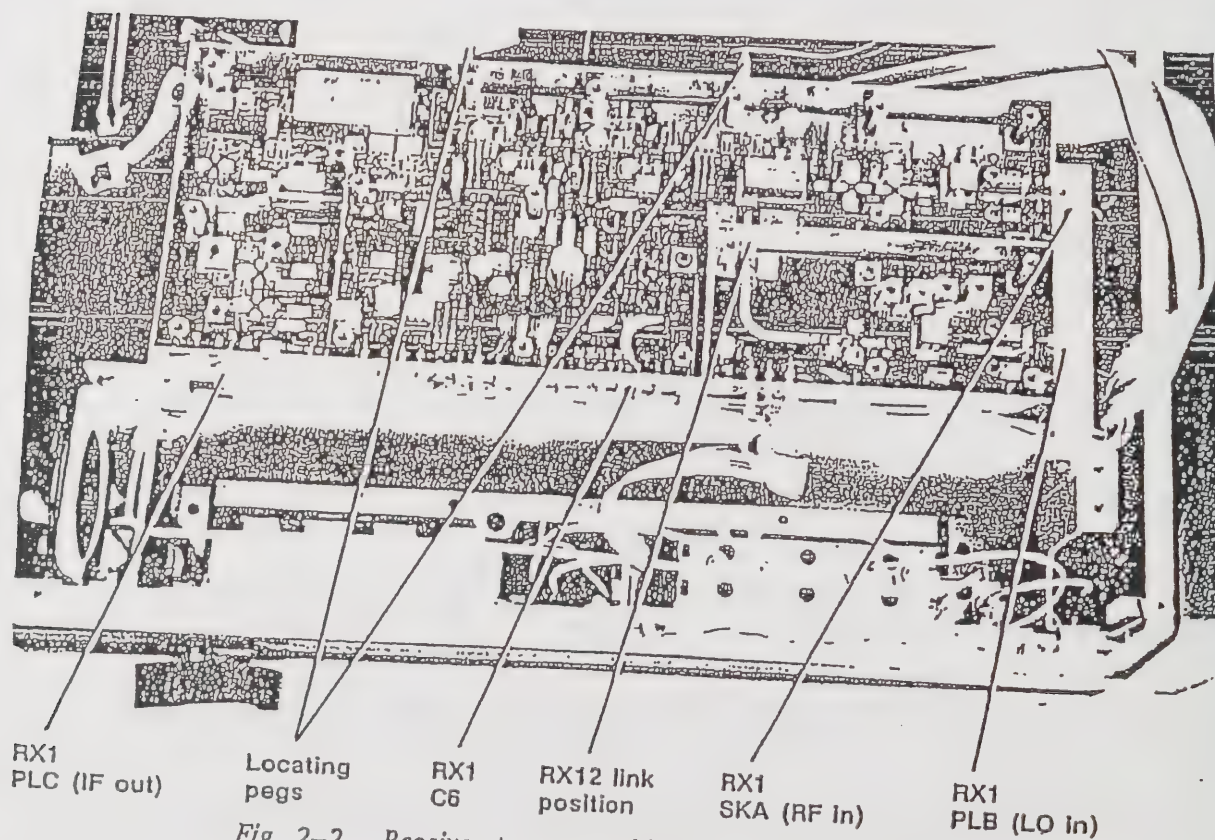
Receiver tray assembly RX1 with lid removed
